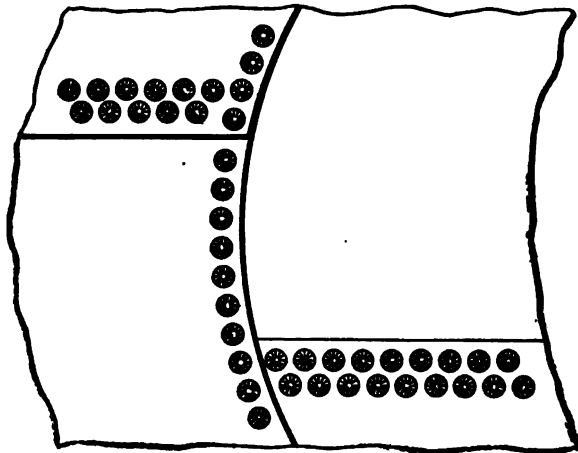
Typical Boiler Shell Showing Method of Riveting
